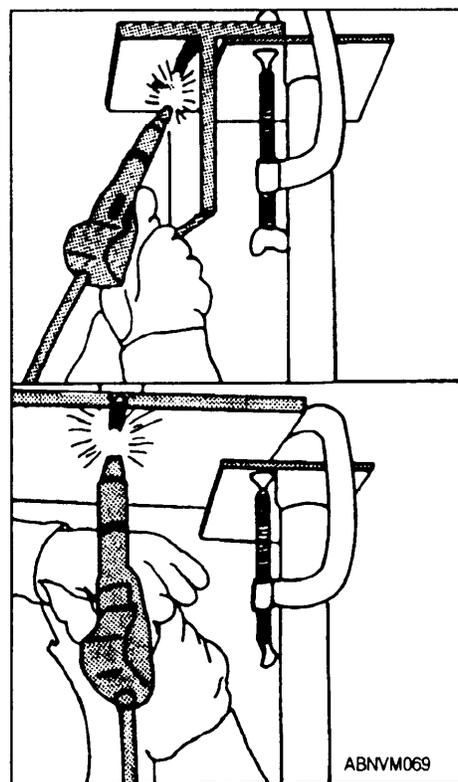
Welding overhead multipass fillet and butt welds.
